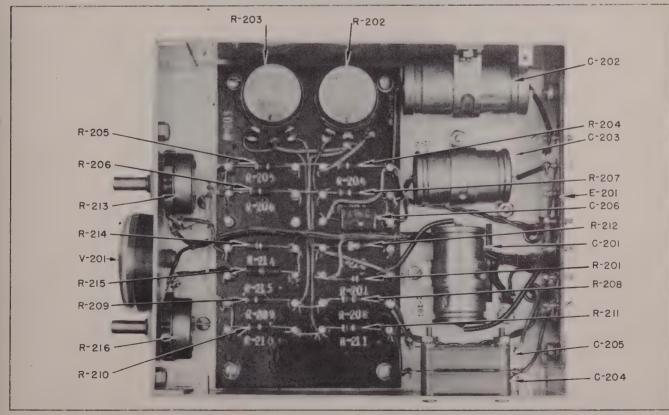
Cathode Ray Indicator Unit, Bottom View
